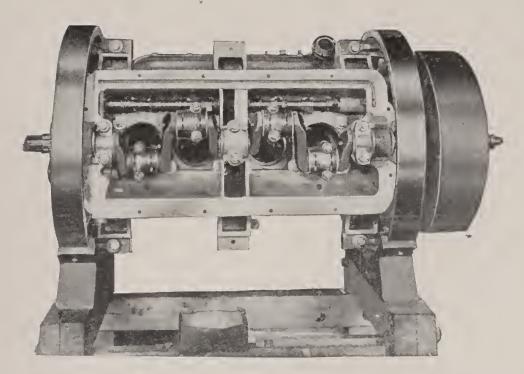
Bottom view of same Motor with oil pan removed showing Crank Shaft, and Connecting Rods.
